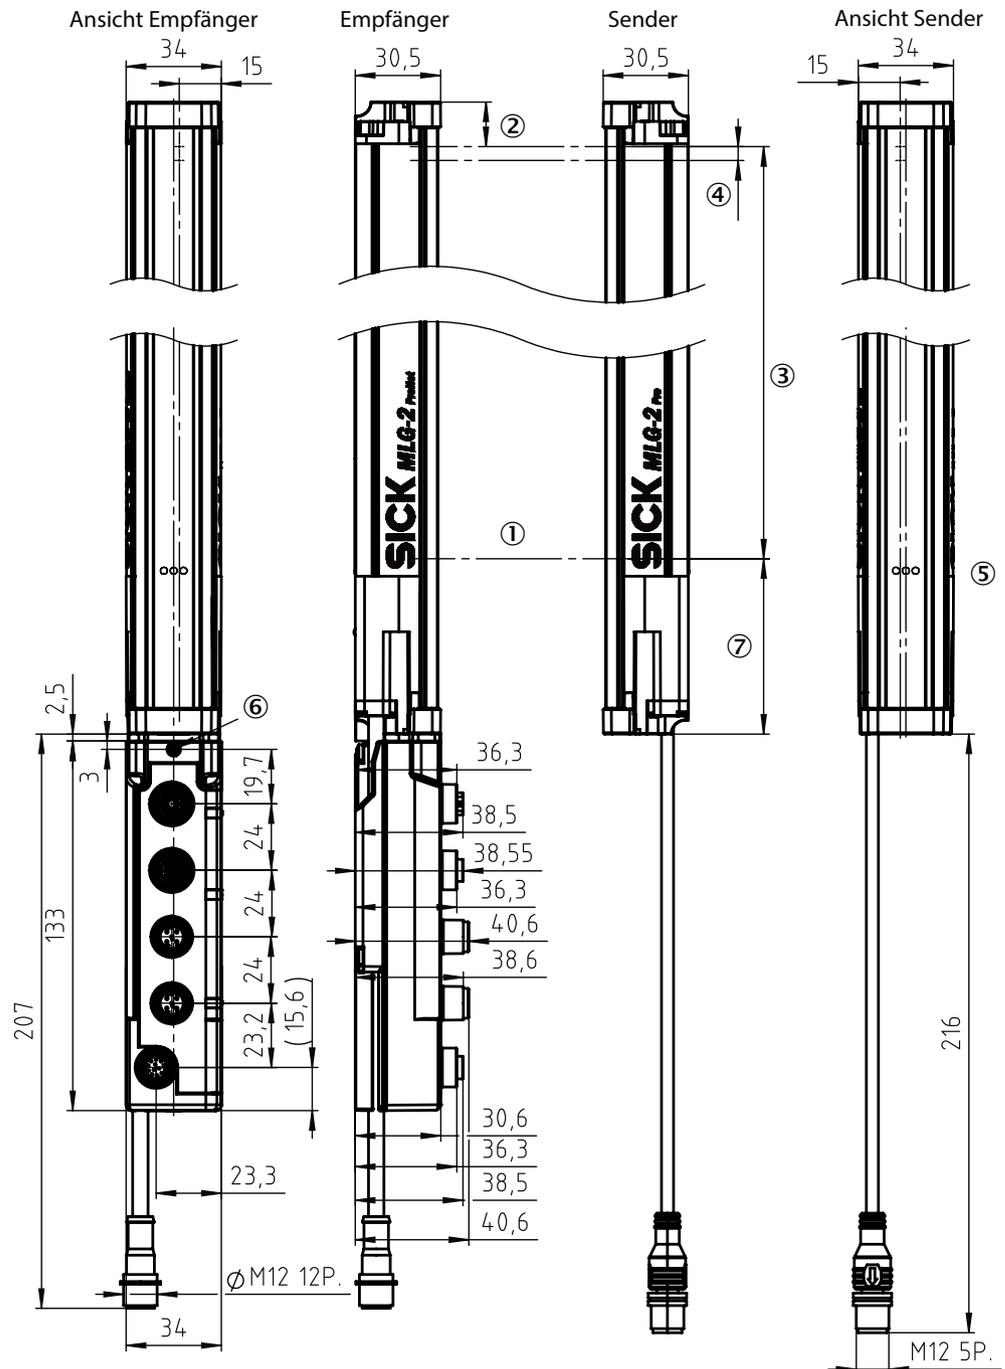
Dimensional drawing MLG-2 ProNet (mm)
